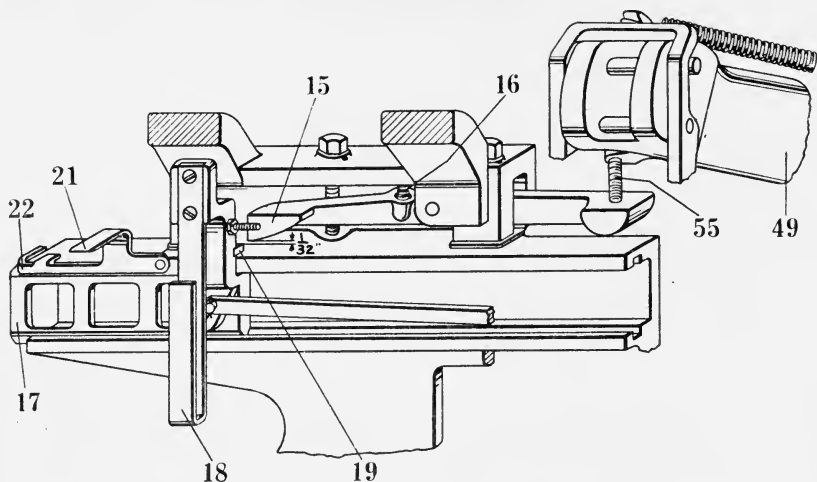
Elevator Transfer Slide. When the second elevator lever 49 has caused the second elevator to be seated upon the transfer channel, the screw 55 depresses the releasing lever 15 which clears a block 19 in the transfer finger slide 17. The slide then is permitted to push the matrix line by means of the finger 18, from the first to the second elevator. While the second elevator is seated upon the transfer channel there should be $\frac{1}{32}$ " clearance between the releasing lever 15 and the block 19 on the transfer slide 17. When the second elevator is held up at the distributor because of a distributor stop, or is prevented from seating fully on the transfer channel, the releasing lever will not be depressed to clear the block on the transfer finger slide and the machine will come to a stop.
